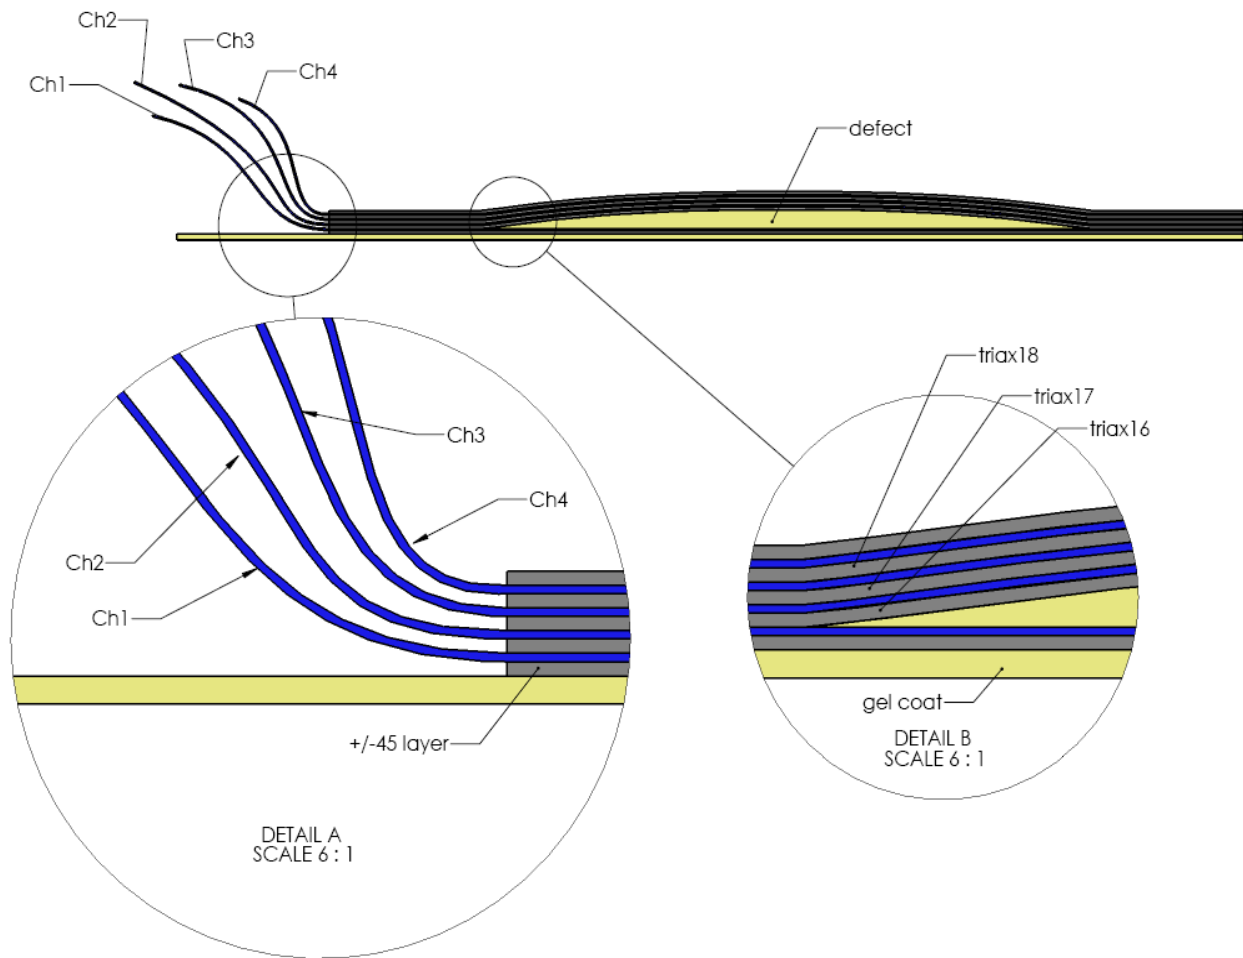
Sectional view of defect with optical fibers embedded in four layers of the spar cap.
